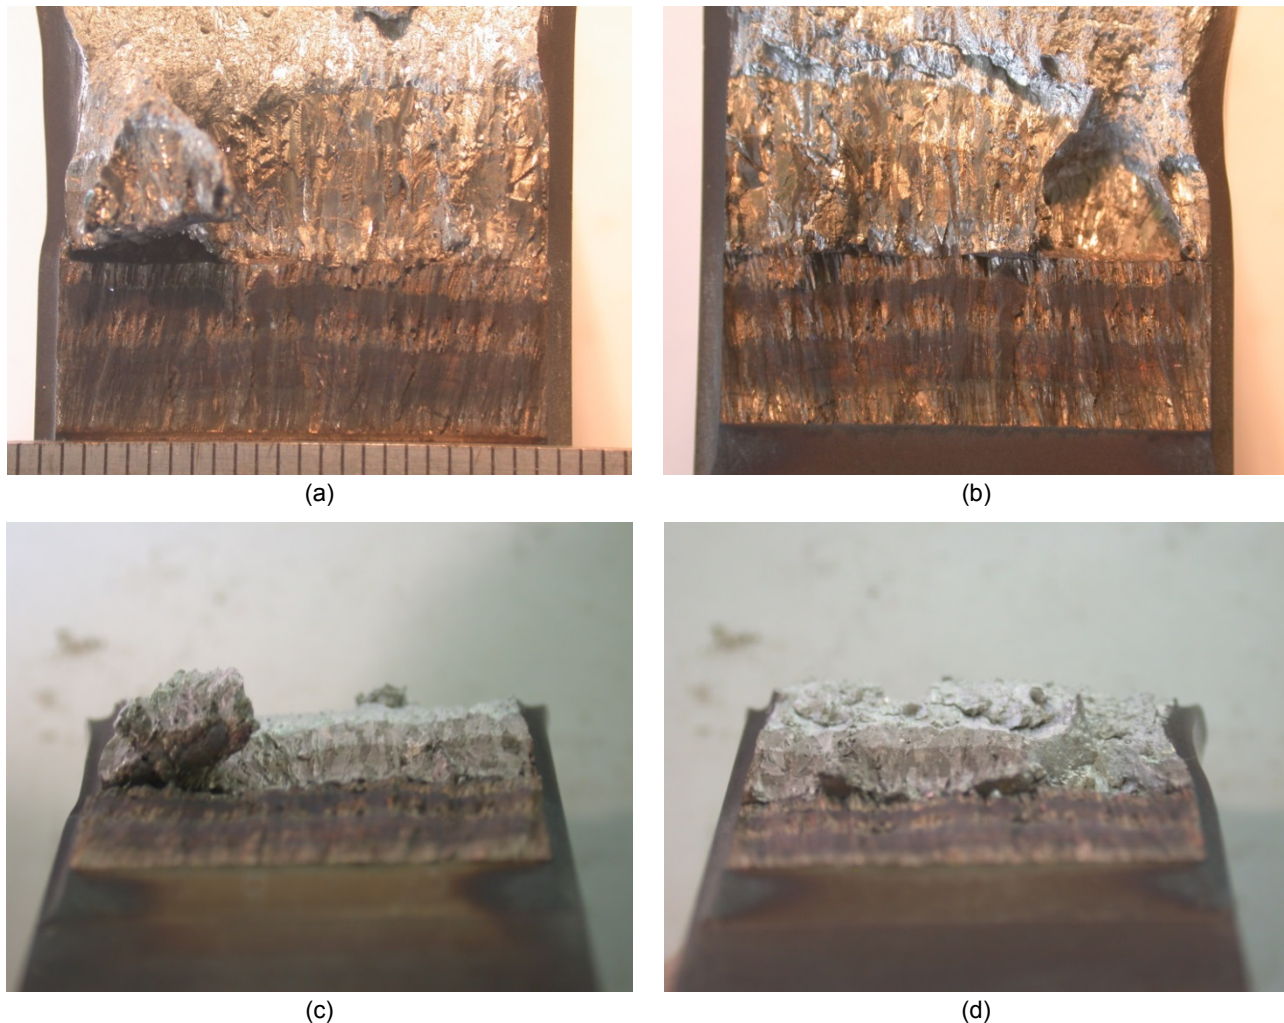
(a, b) The two halves of fractured specimen A52M-182-TS-1. Crack advance is from bottom to top. (c, d) Same fracture surfaces photographed at an angle to show the cracking pattern at the interface.
